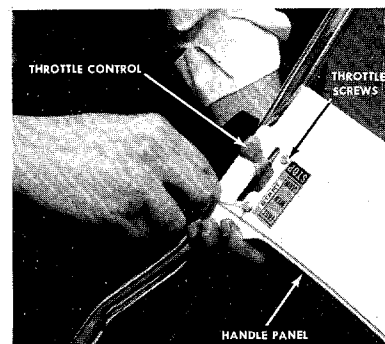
THROTTLE CONTROL ASSEMBLY
